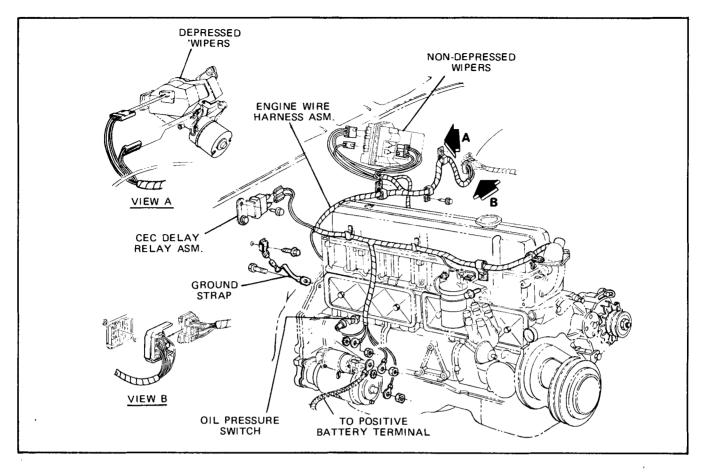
A Series (L-6) Engine Wire Harness Installation
